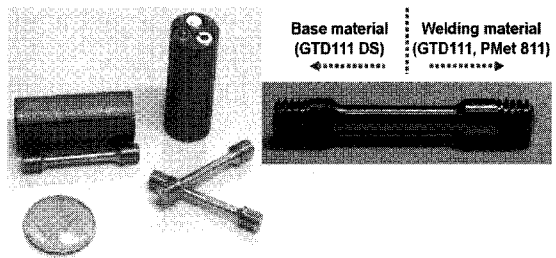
The size and appearance of specimen(L) and substrate and welding division after manual overlay welding(R)
